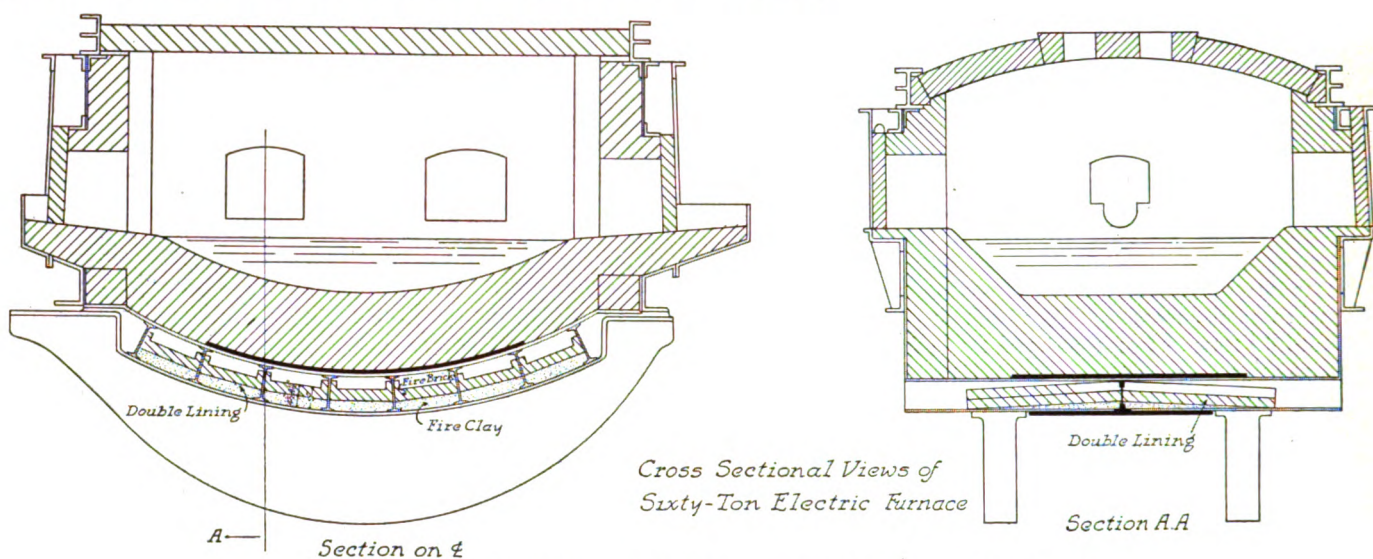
Cross-sectional views of 60-80-ton furnaces building at River Rouge.
